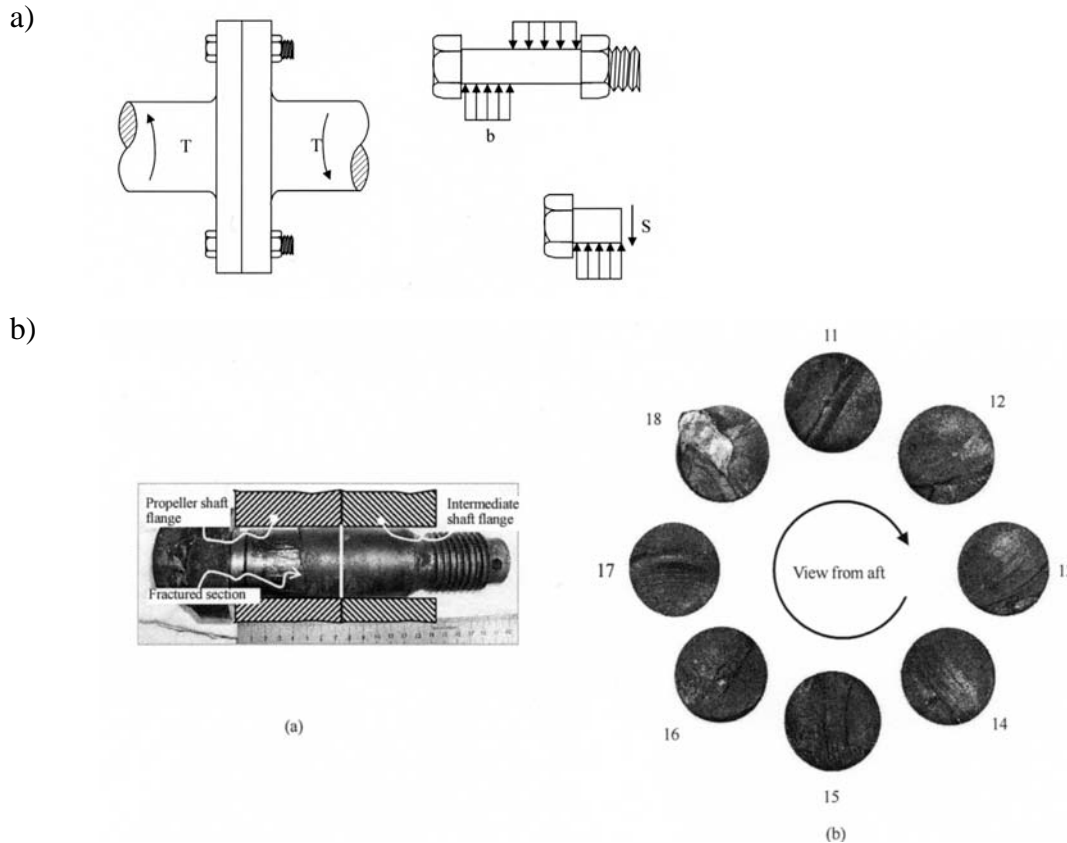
a) Bolted connection of the shaft collars and collar with broken bolt, b) View of the fatigue cross-section with original position of the broken bolts in the shaft collar [5].
